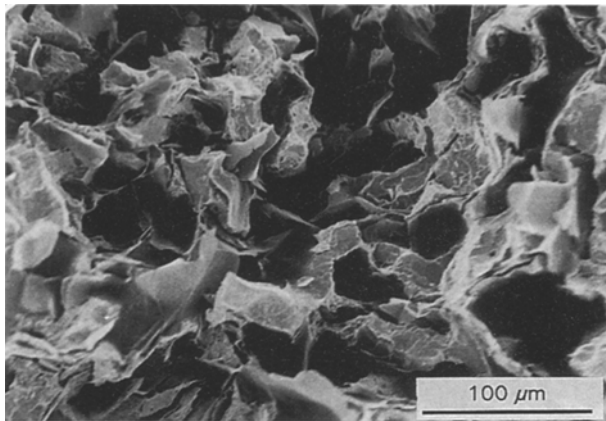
Fractograph of Alloy D specimen taken 105 mm from chill end and cast using a 25 mm chill.
